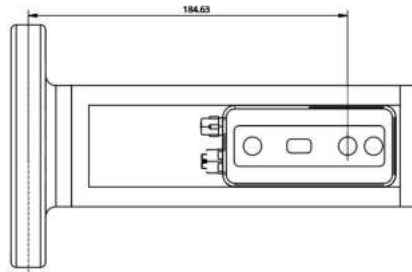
Camera holder CAD model with dimensions in TCP's z -axis.
